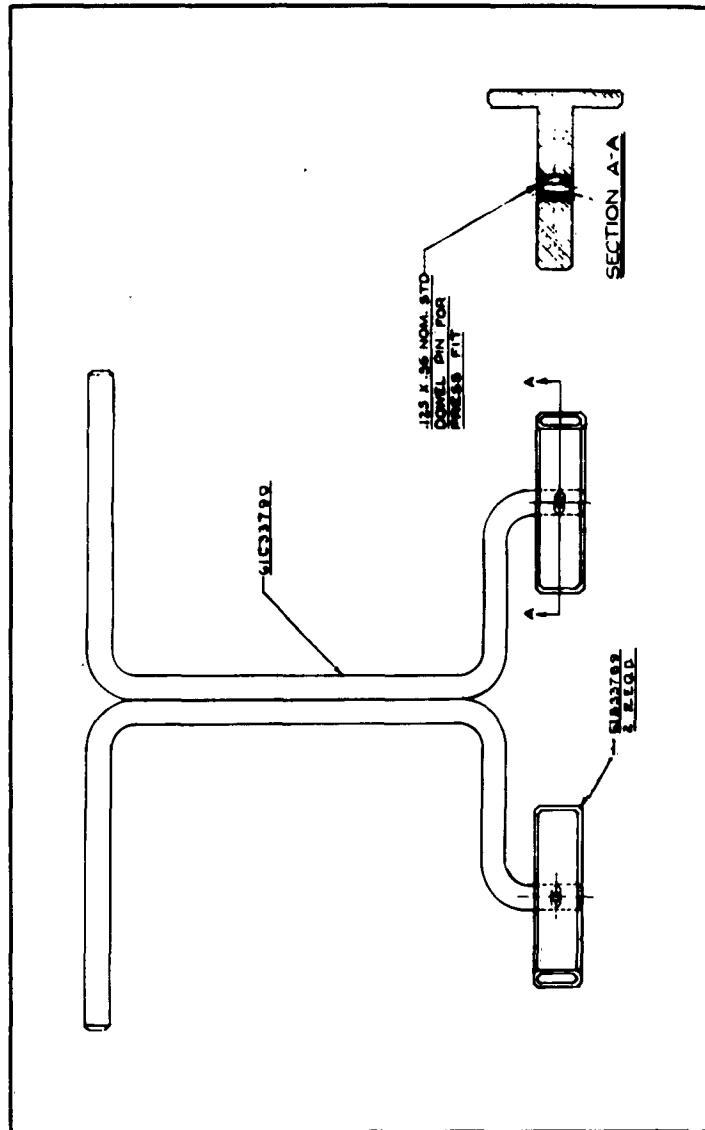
OAMA Dwg No. 61C33791 Wrench Assembly - Closure Plug, XM-51.
